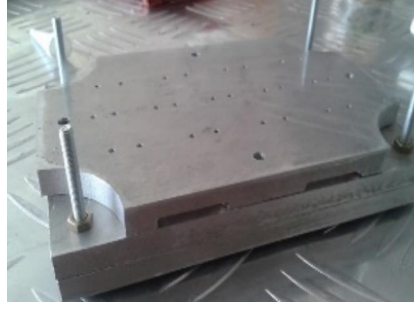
Assembled mould where screws were used to fasten three mould layers.
